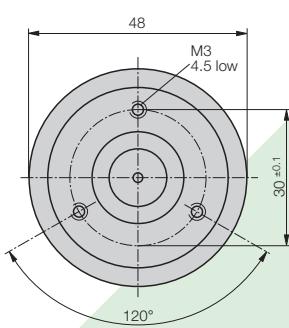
KINAX 3W2 with shaft dia. 2 mm, length 6 mm, standard version.
